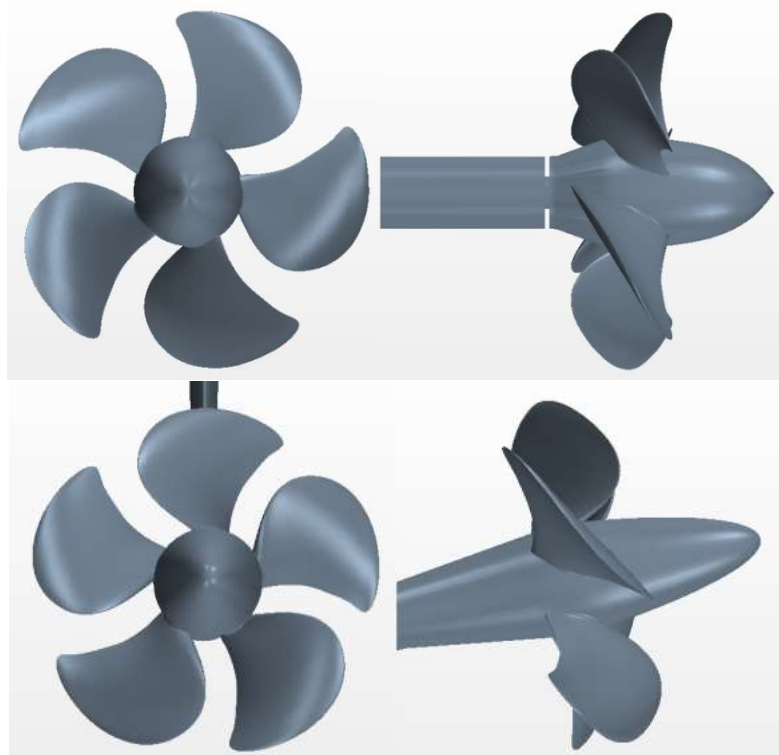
CAD geometry of the *PPTC VP 1304* Propeller (Top; PPTC with axial shaft, Bottom; PPTC with inclined shaft)
